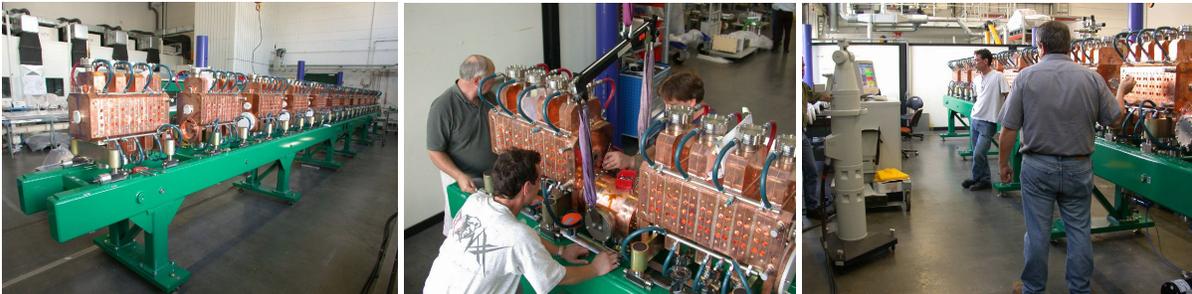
CCL Module-1, bridge coupler installation, and alignment.
